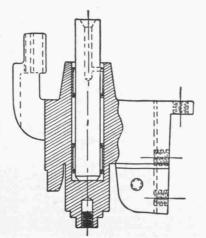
A hole along the axis of the shaft with a cross hole opening under the lip of the upper bearing provides lubrication to the Needle Bearings in this textile machine spindle swing bracket.
